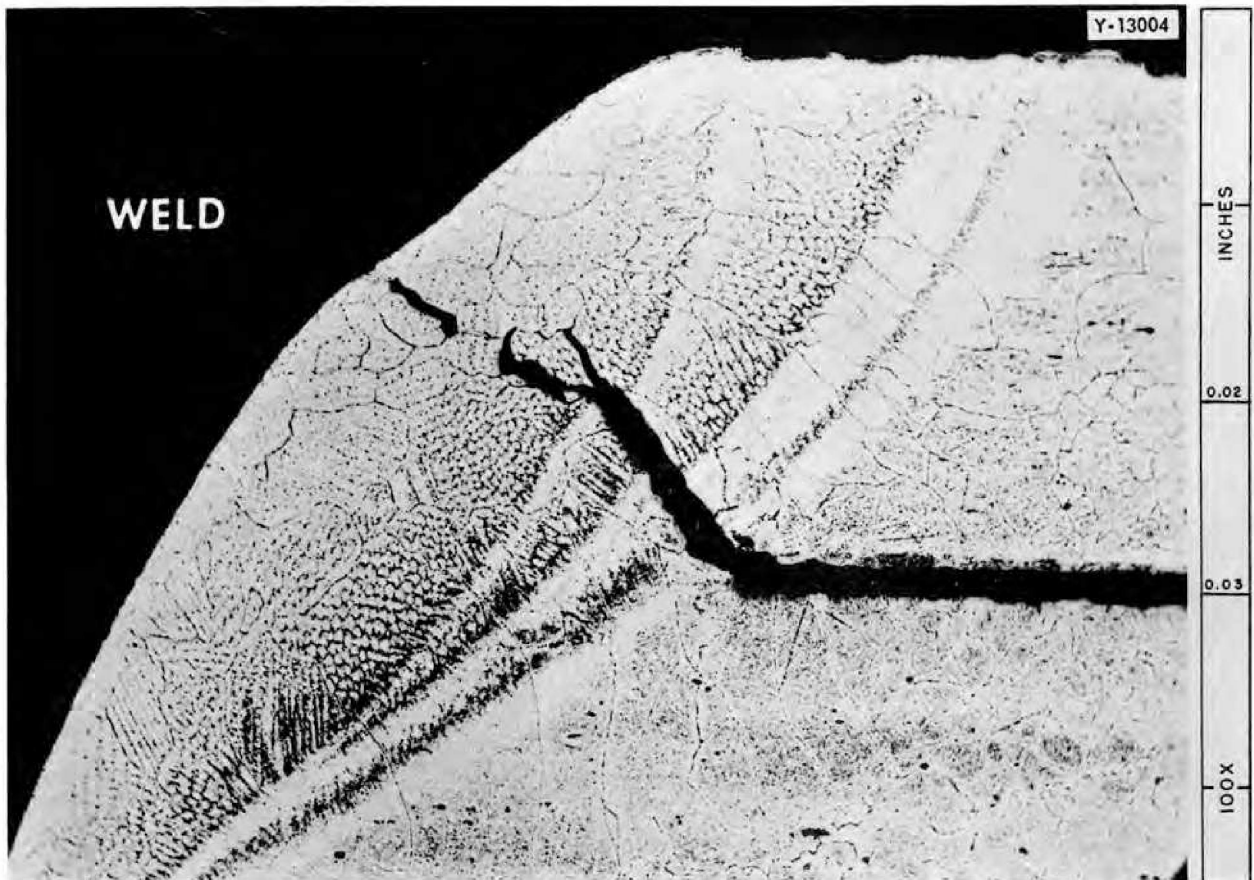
Tube-to-Header Weld Exhibiting Extensive Microfissuring. Etch: electrolytic; oxalic acid.
